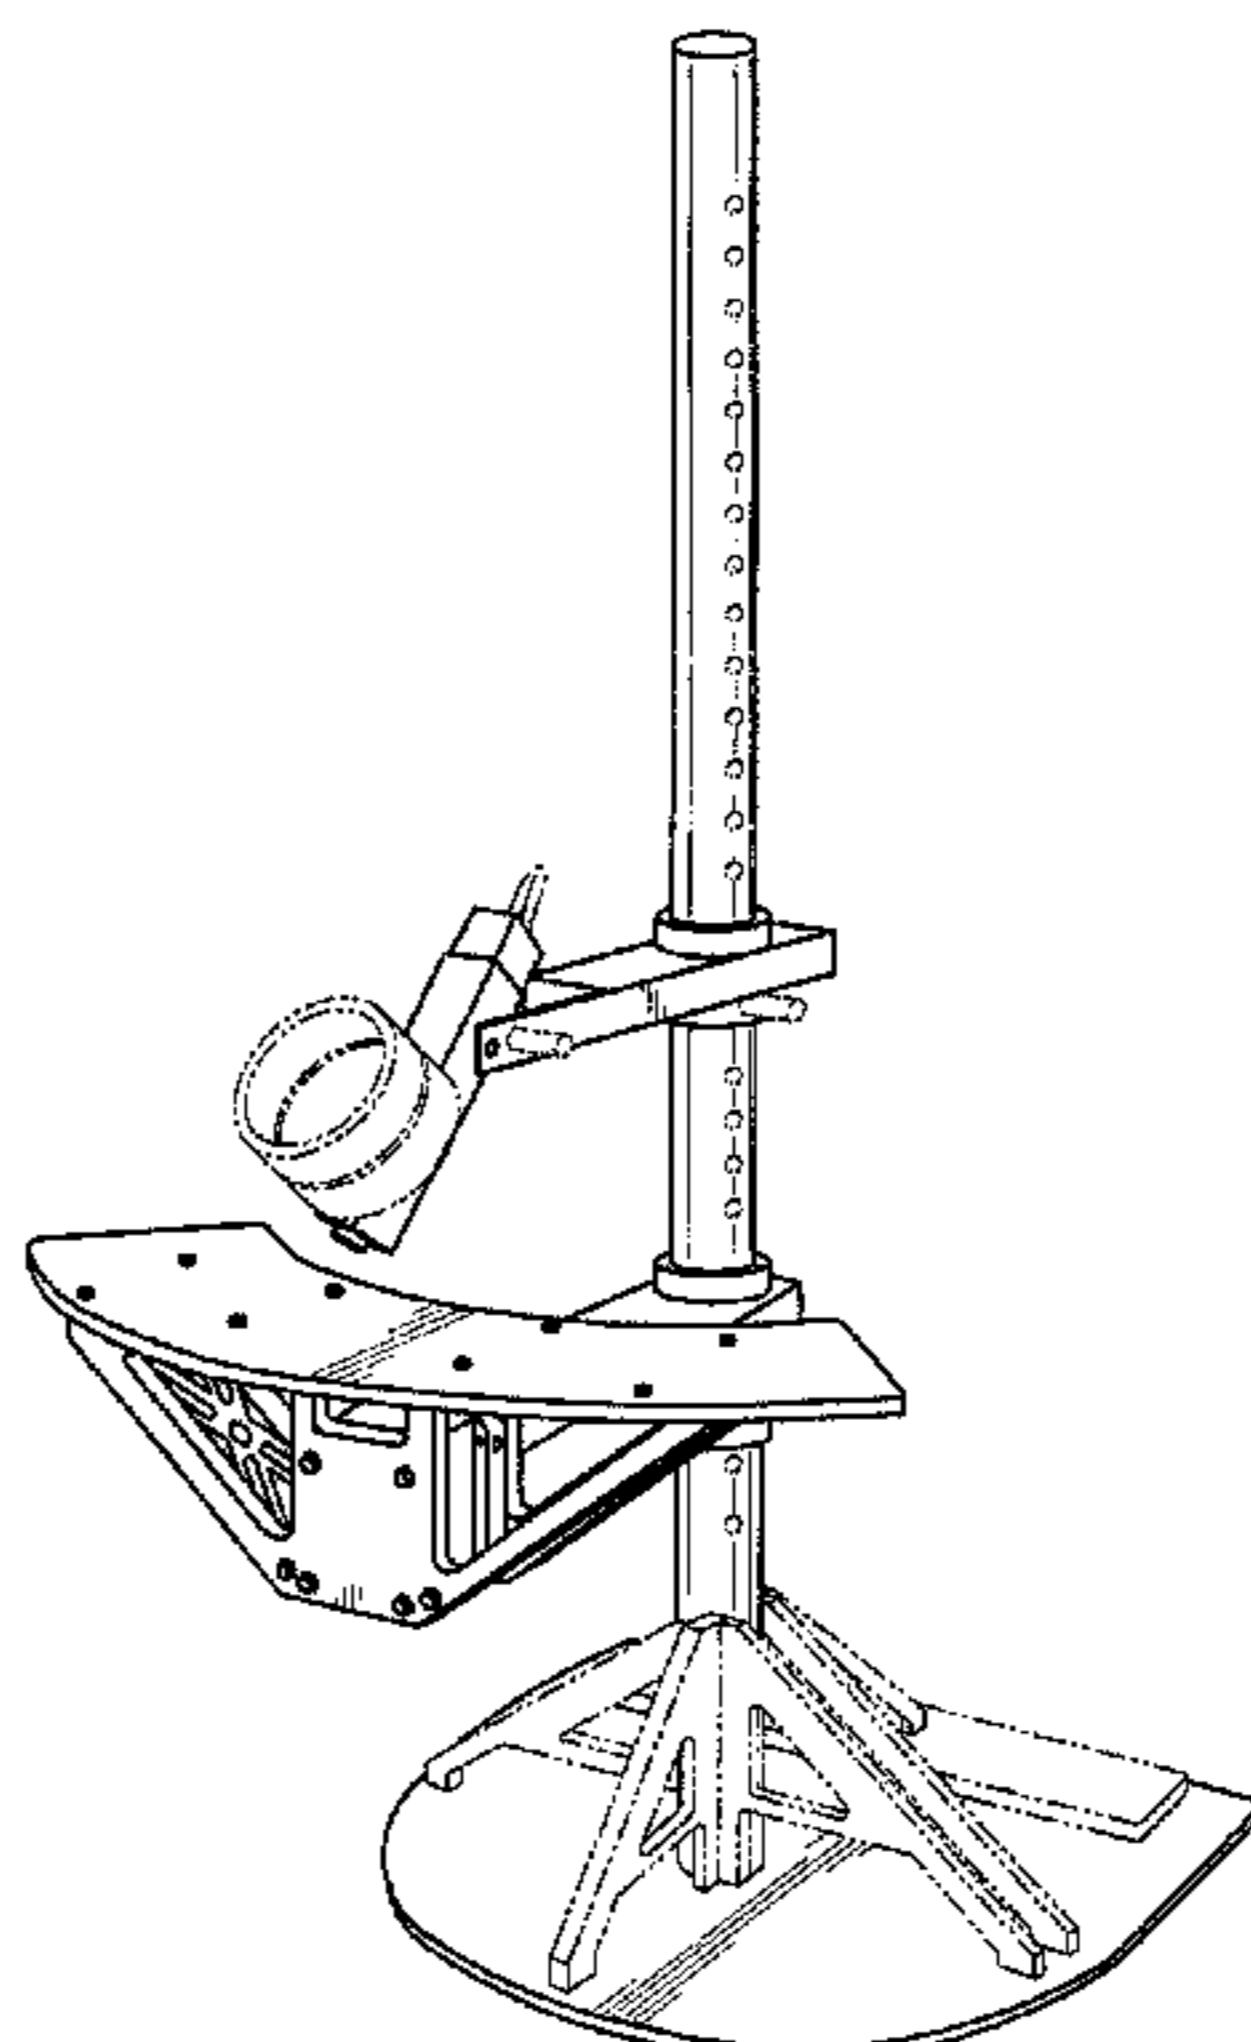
is a left side view of the simulator welding coupon stand of the embodiment illustrated in FIG. 7;
